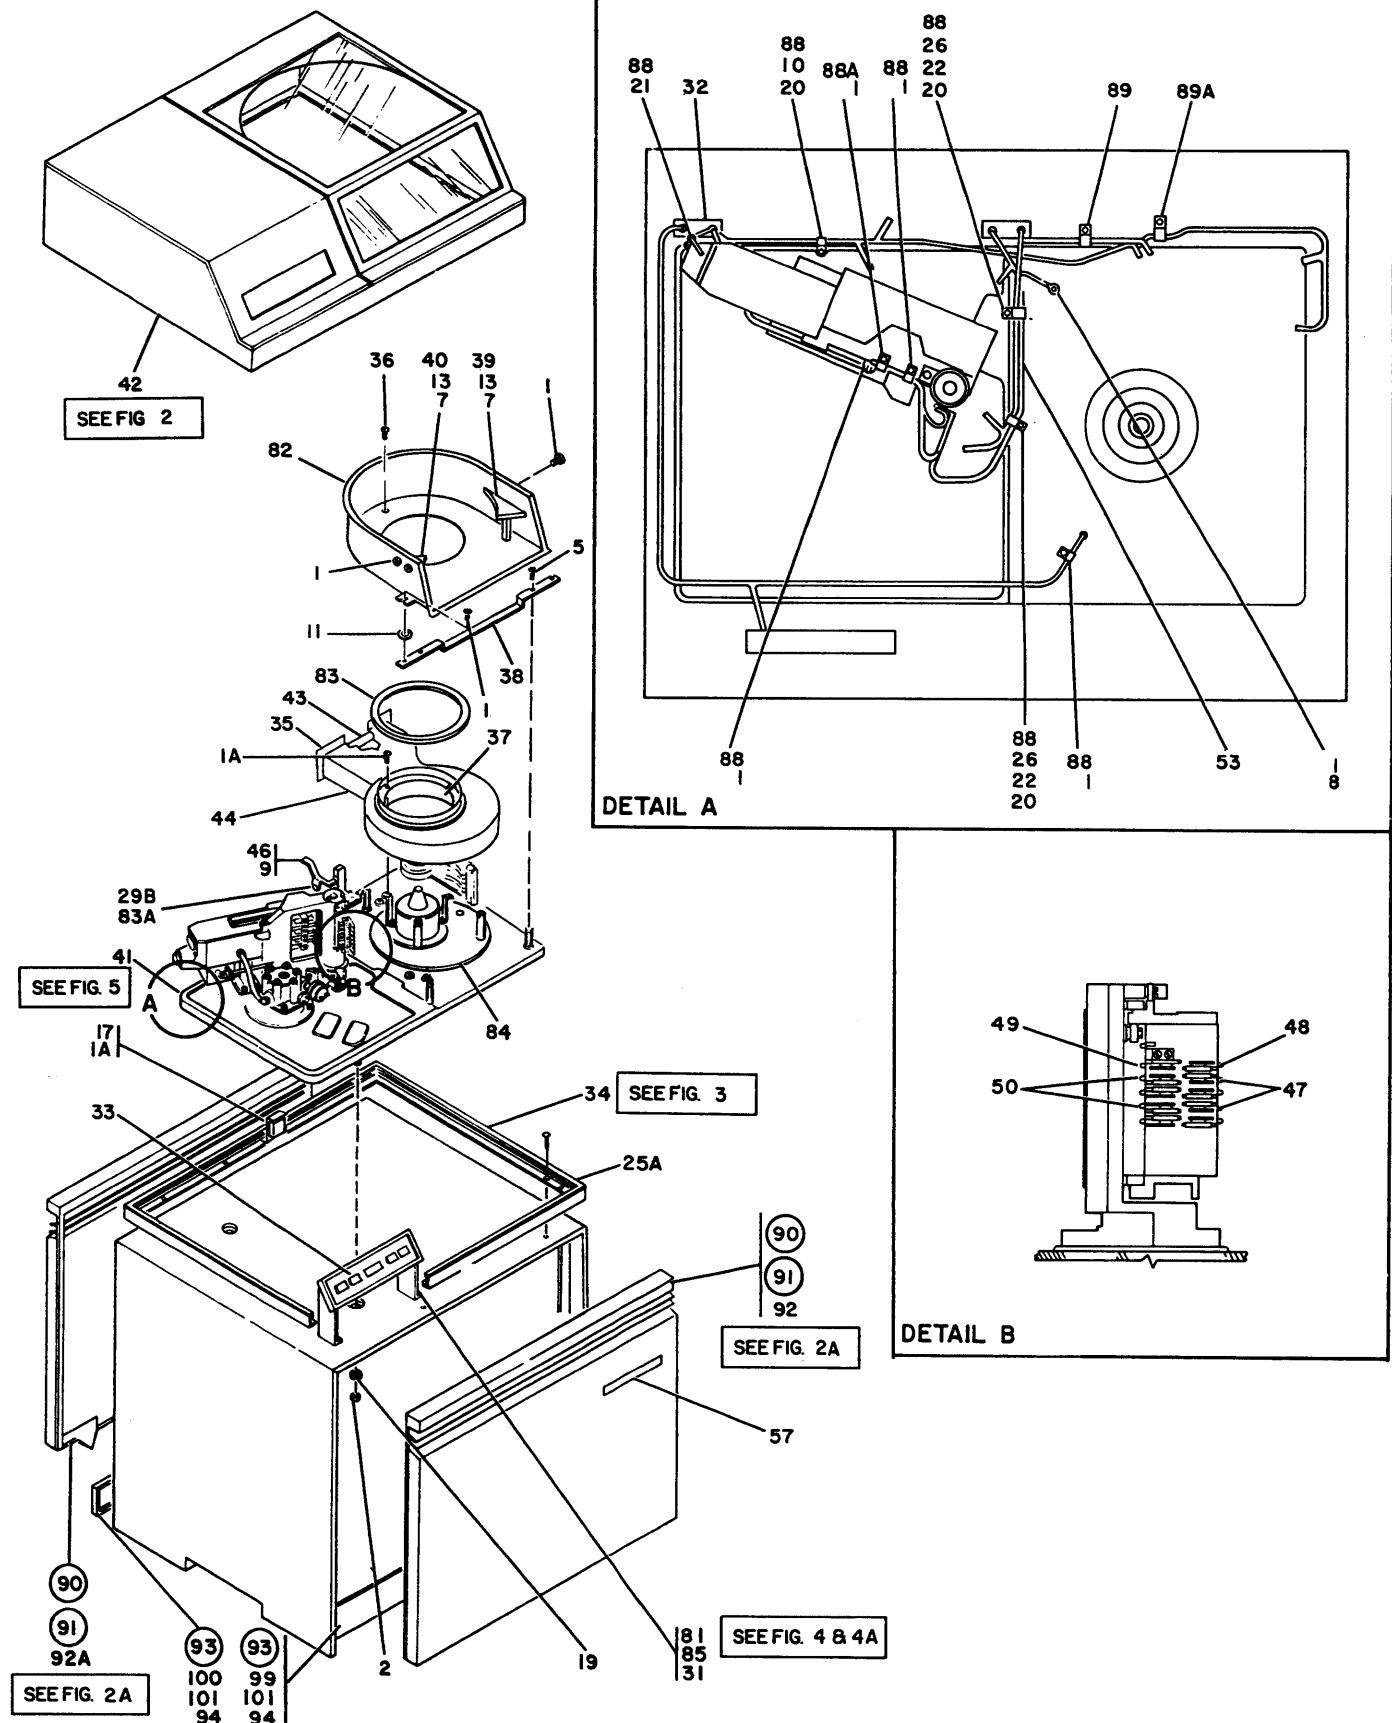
2311 DISK STORAGE DRIVE FINAL ASSEMBLY. SHEET 1 OF 2. SEE LIST 1.
